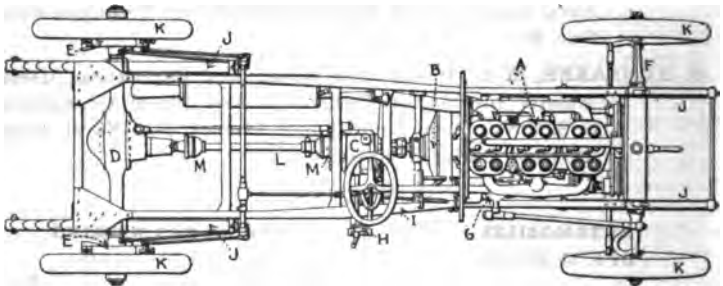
Plan of Chassis of Typical Pleasure Car.
